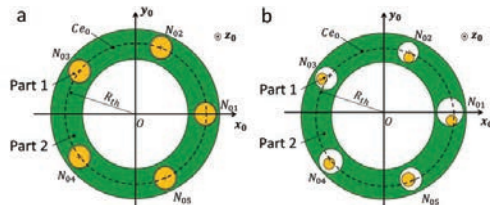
(a) Nominal geometry of parts; (b) Real geometry of parts
